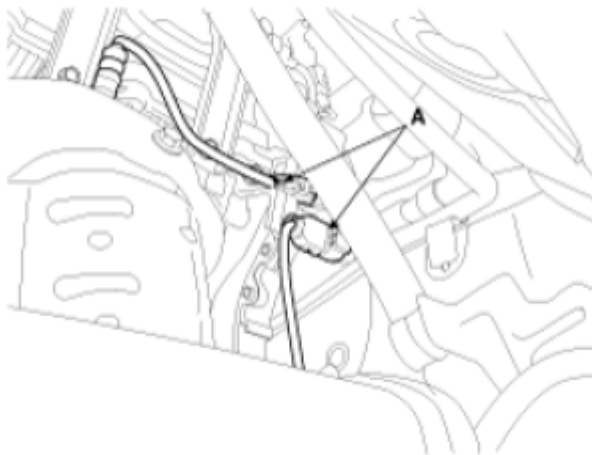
Identifying Bank 1 Front/Rear O2 Sensor Connectors
